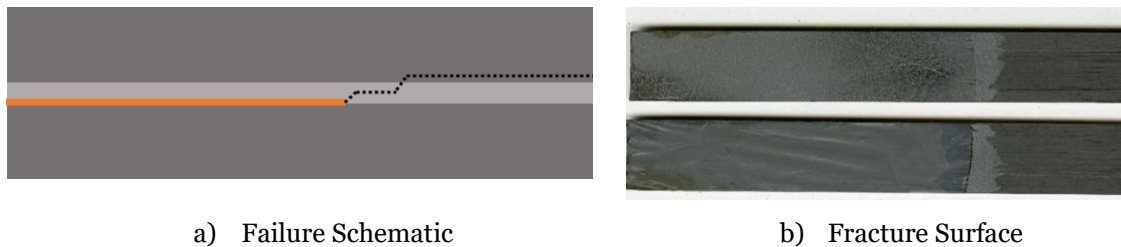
Failure schematic and fracture surfaces for 0.2mm DCB specimens at HTD conditions
